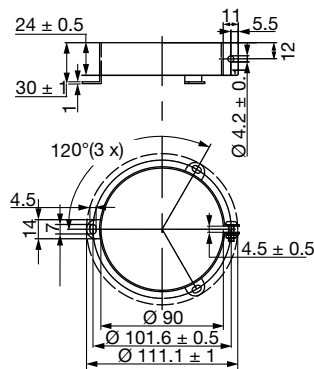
Dimensional outline of clamp for case Ø D = 90 mm
